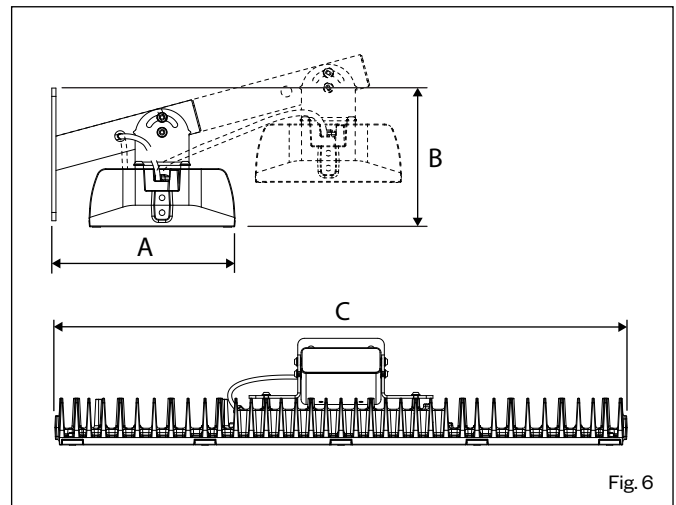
Wall Mount - Overall Dimensions - See Table
